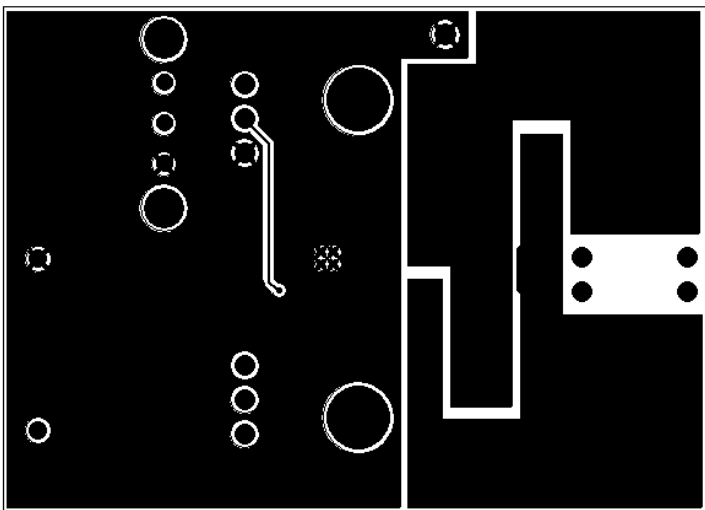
SP6685EB PC LAYOUT BOTTOM SIDE
